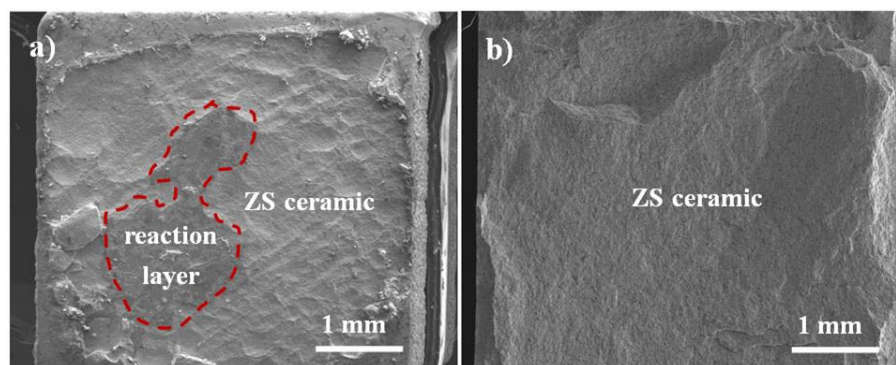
Fracture morphology of the brazed joints: a) without and b) with Cu foam
